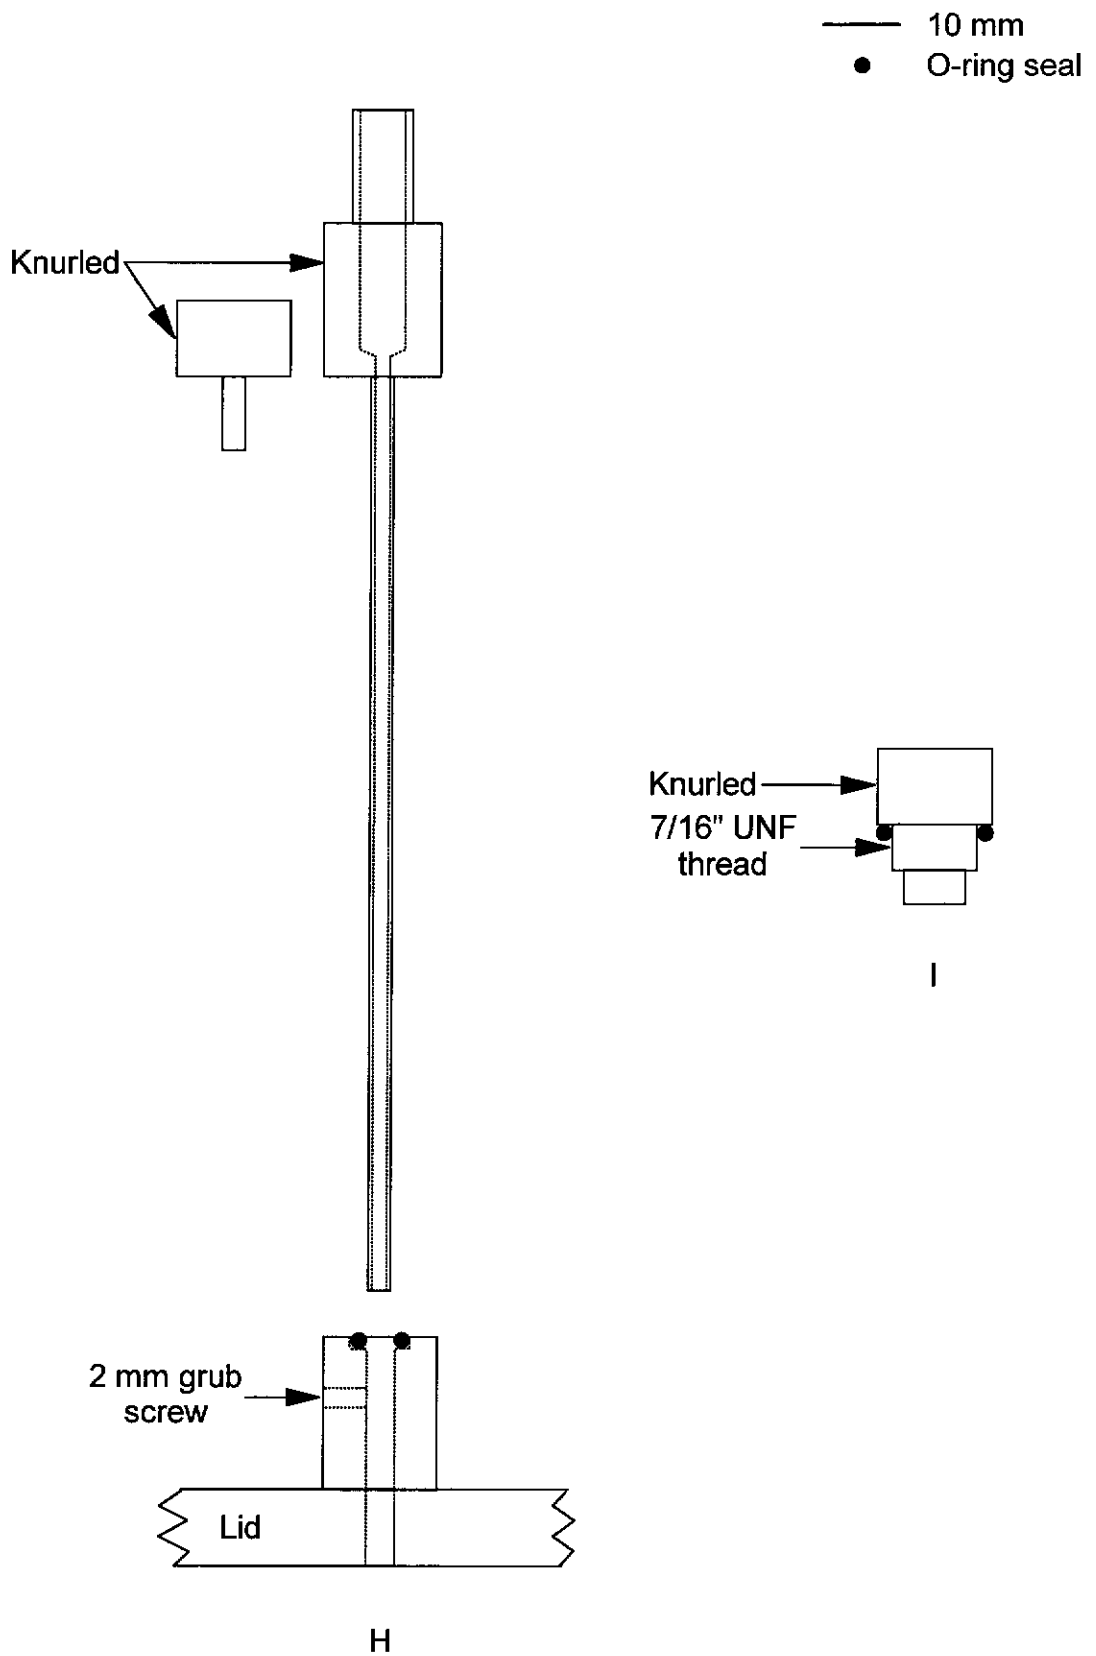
H-I: Cross-sectional view, dimensional drawings of the fittings for the reactor vessel lid.
